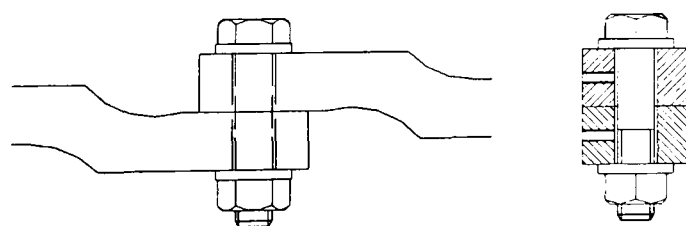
Localised joint detail of the experimental rig showing filleting and sectional view illustrating the clearance hole and tapped accelerometer locations.
